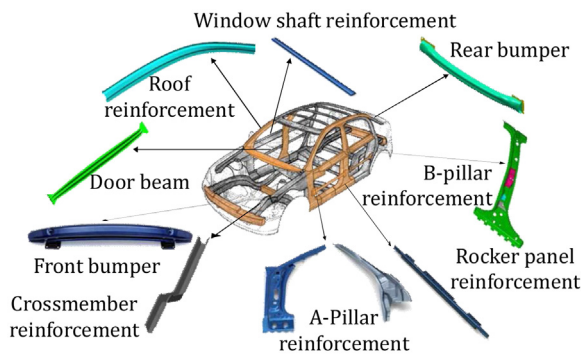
Automobile parts produced by hot stamping in Benteler Automotive (courtesy of Benteler Automotive) [99].
